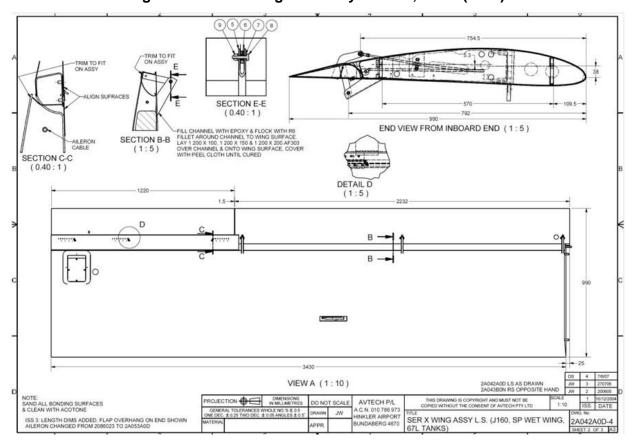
J160 Wing Assembly Sheet 2, Ser X (J160)
